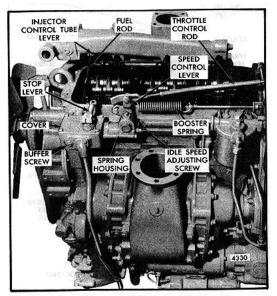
Buffer and Idle Speed Adjusting Screw
